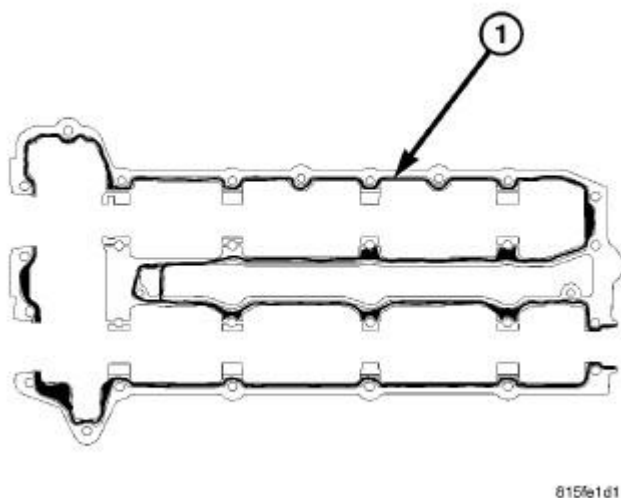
SEALANT APPLICATION TO LEFT CYLINDER HEAD COVER
